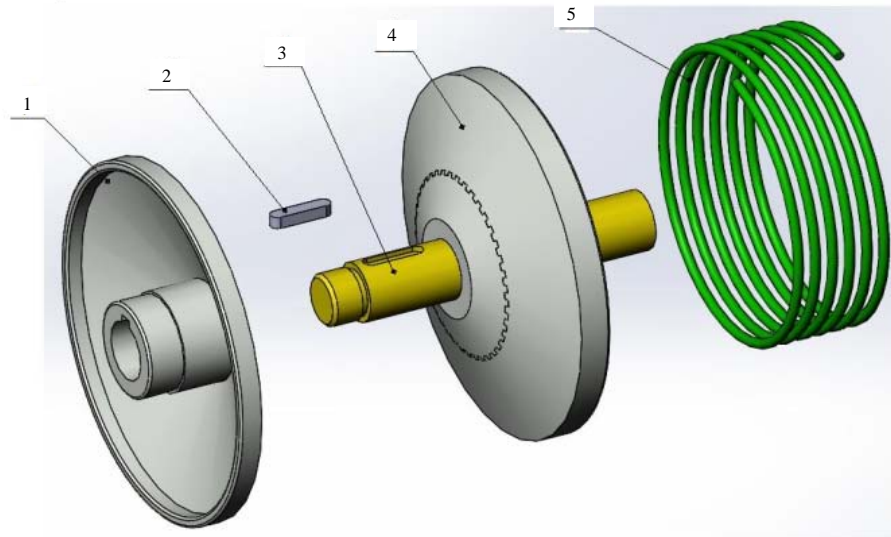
The driven pulley of the variator: 1) Fixed half; 2) Key; 3) Driven shaft; 4) Movable half and 5) Cylindrical spring
